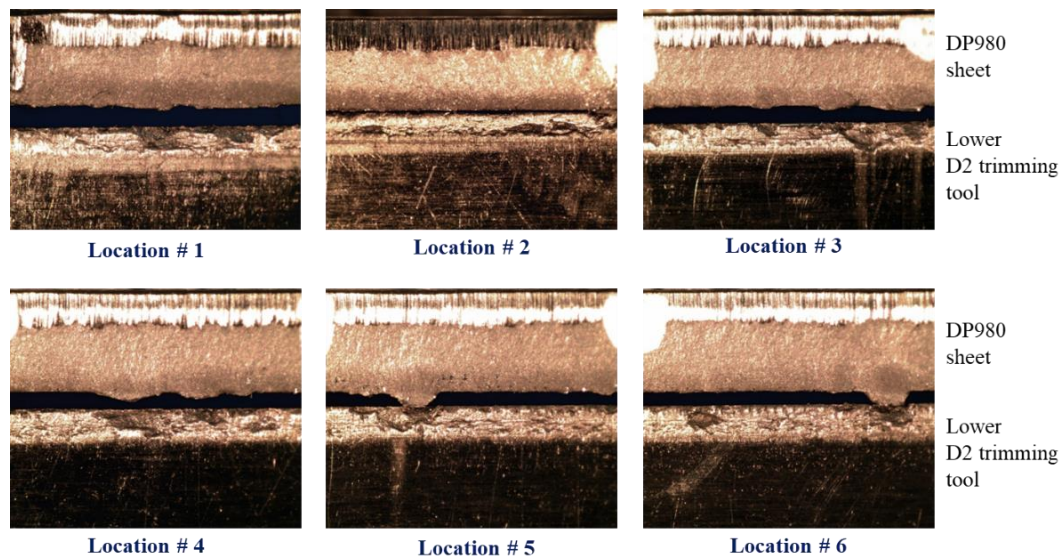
Optical views of the lower trimming tool after 230,000 cuts at designated locations 1 to 6. The trimmed DP980-1 blank is aligned above the die to visualize the correlation between local tool wear and burr formation.
